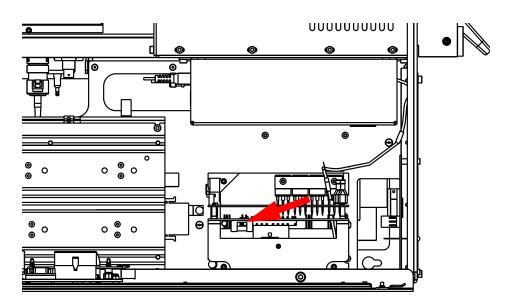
DC Driver Assembly Fuse (Left Side)
